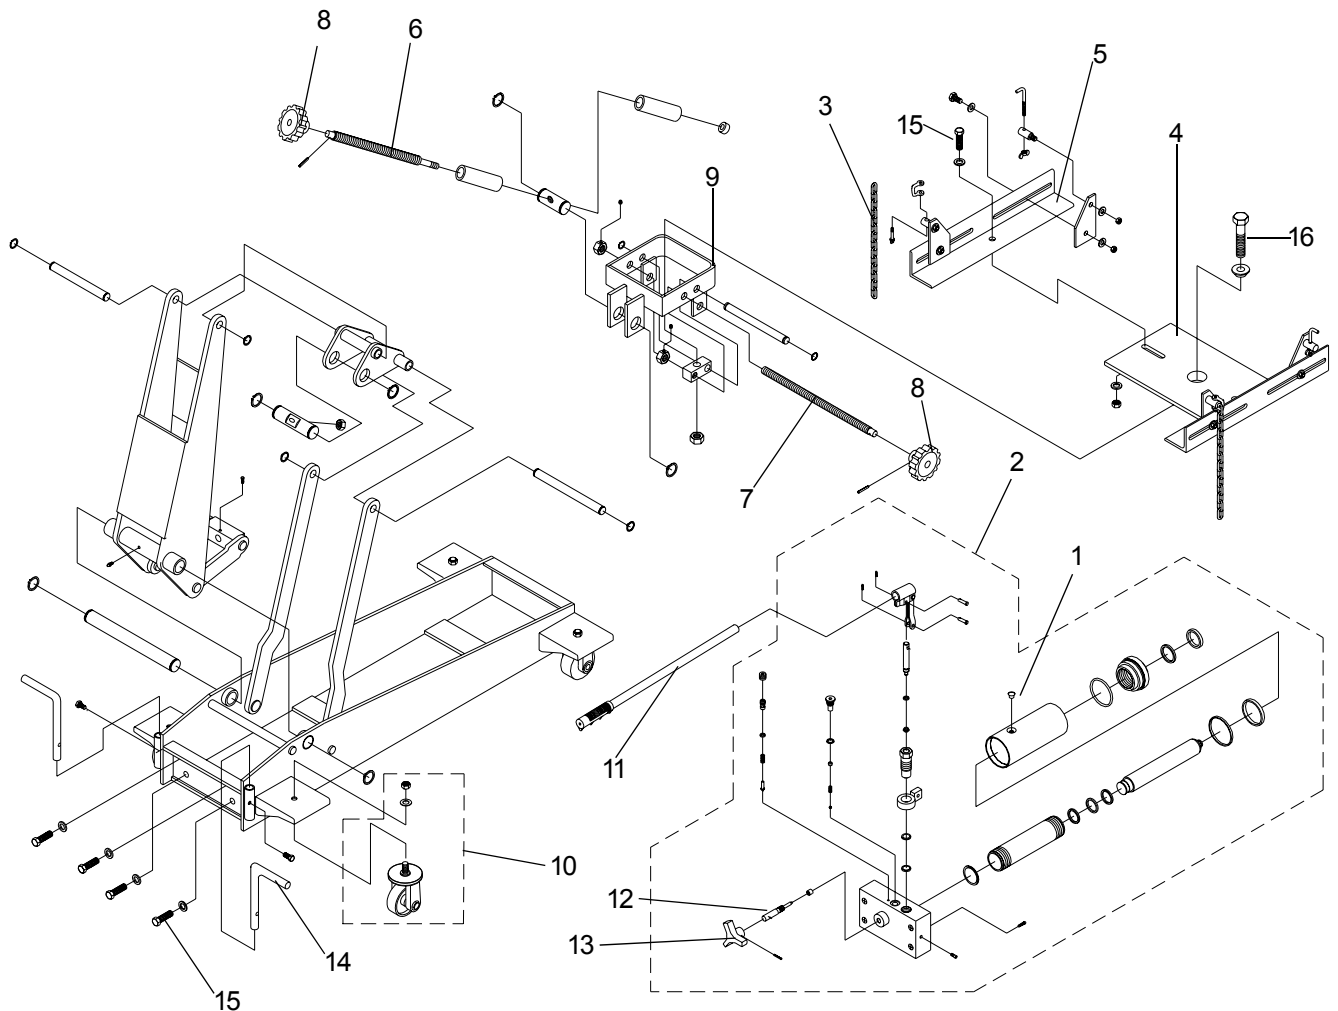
Replacement Parts Illustration for Model KTI-63511
